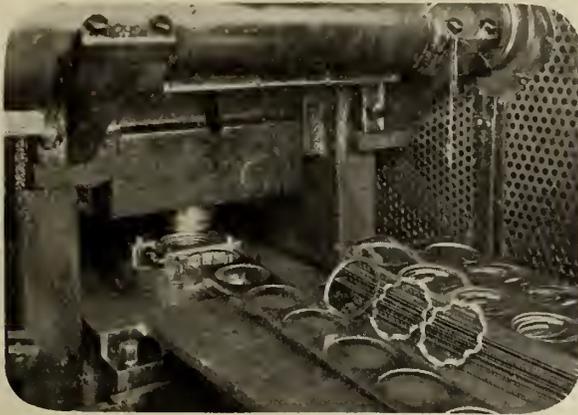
Stamping Machine Used in Making Blanks for Retainer.
